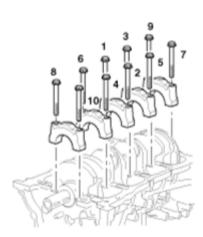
Installing Torque Sequence Of Main Bearing Cap Bolts Courtesy of KIA MOTORS AMERICA, INC.
